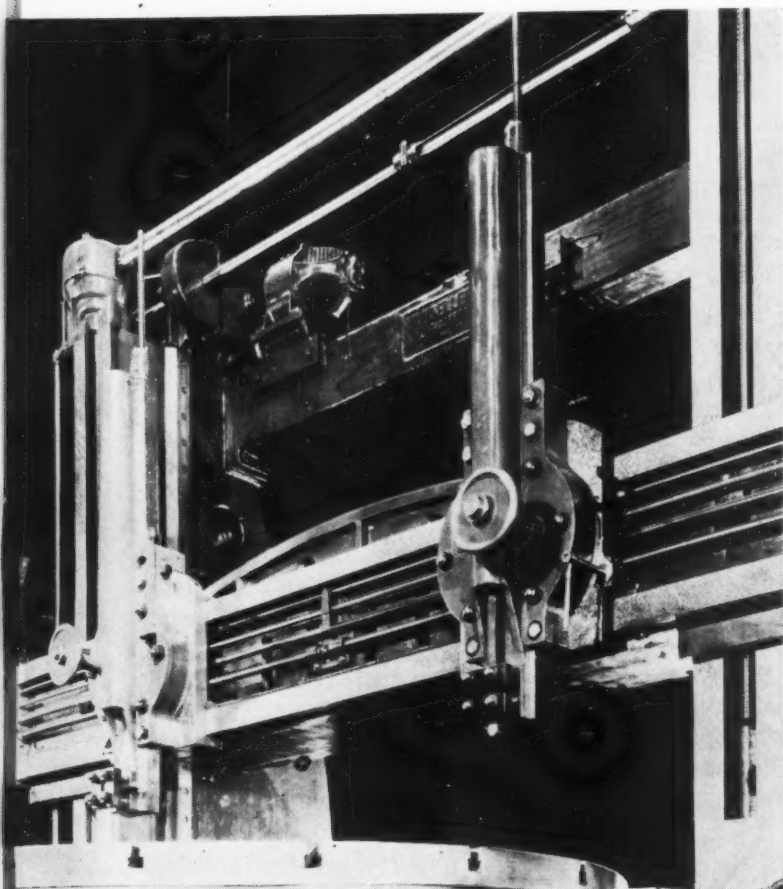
A variety of materials including ground shafting, cast iron, chrome-nickel-molybdenum steel and stainless steel are employed on head for a planer-type milling machine
